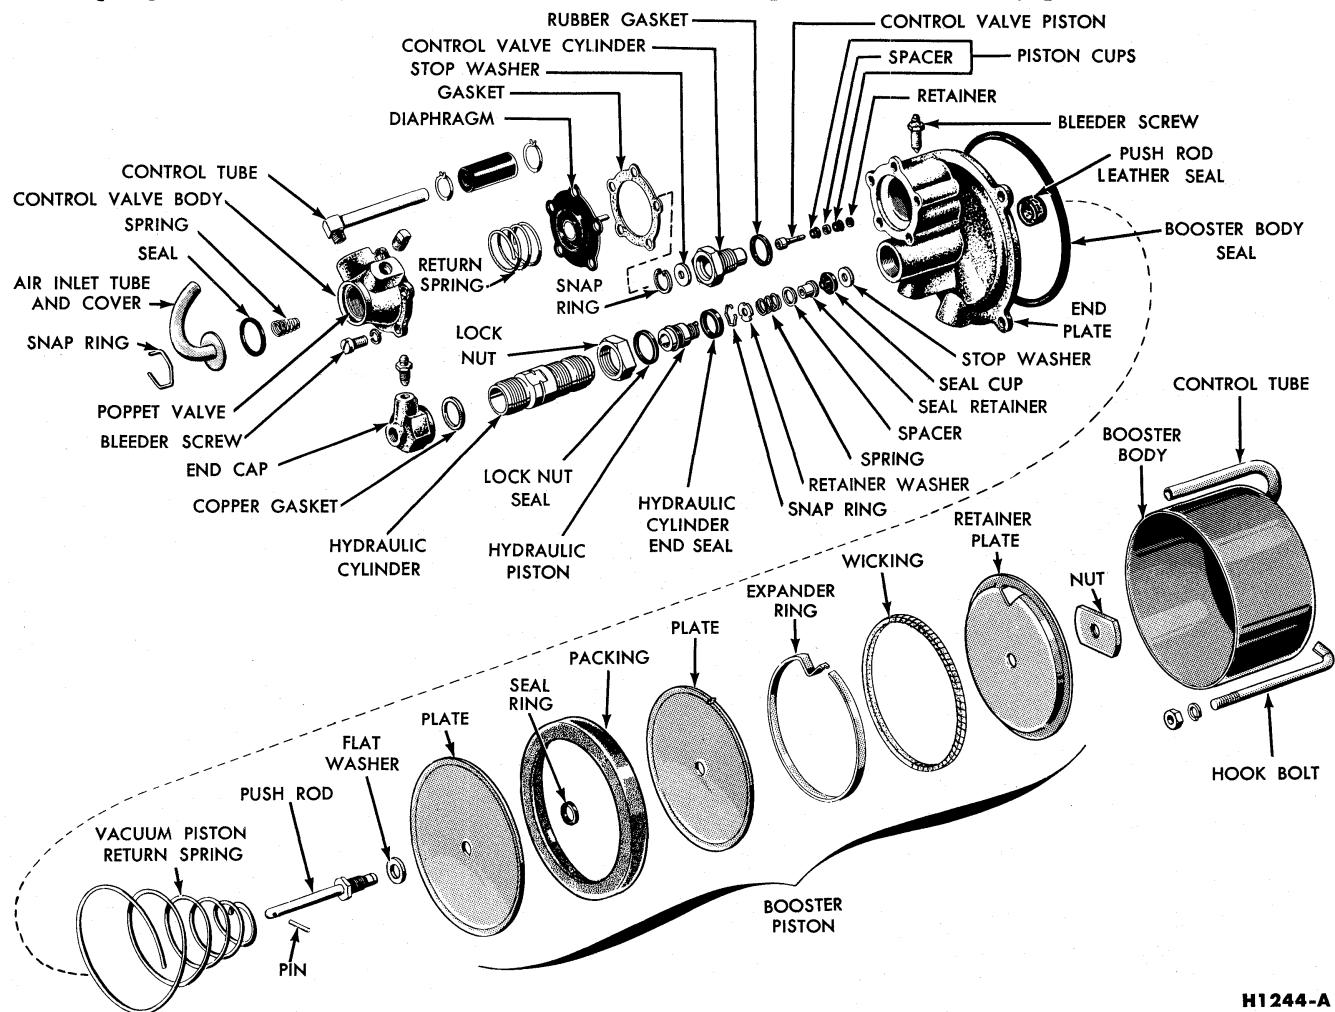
Piston Type 6 $\frac{3}{4}$ -Inch Booster—Disassembled
